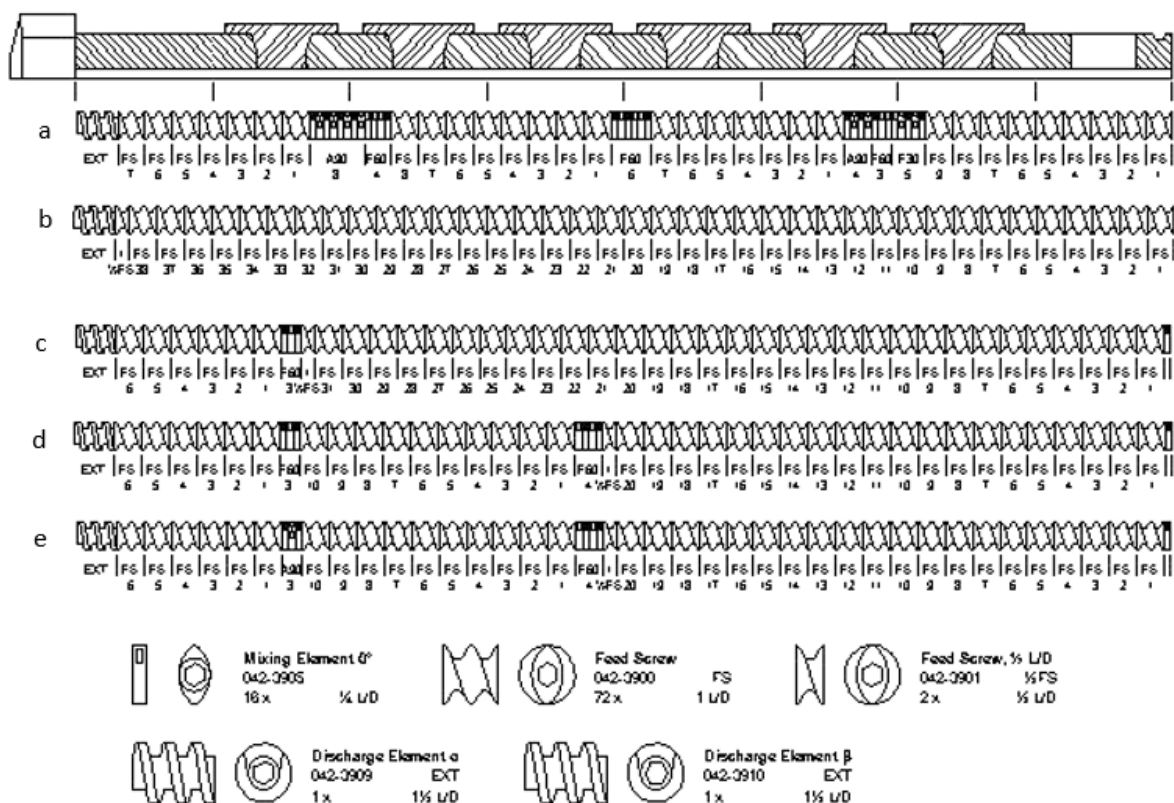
e: a: ThermoFisher Preconfigured Screw Design; b: All Conveying Screw Design; c: Single Mixing Zone Screw Design; d: Two Mixing Zone Screw Design; e: Modified Final Mixing Zone Screw Design.
